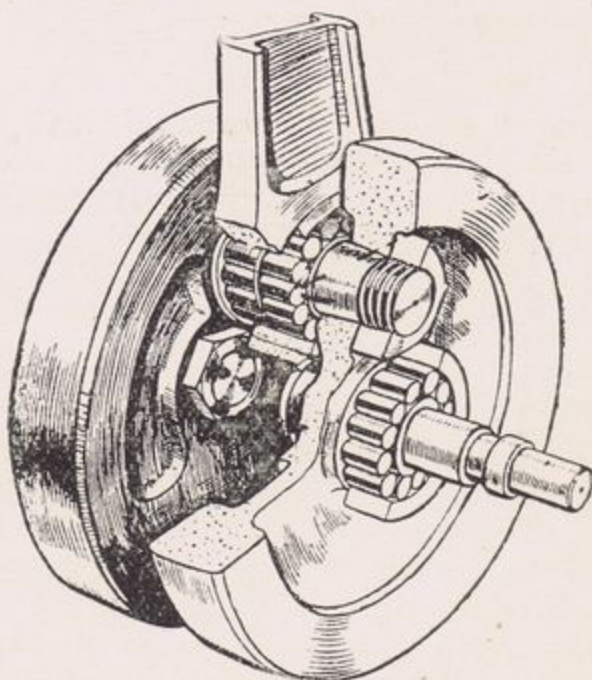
THE "PANTHER" FLYWHEEL ASSEMBLY
